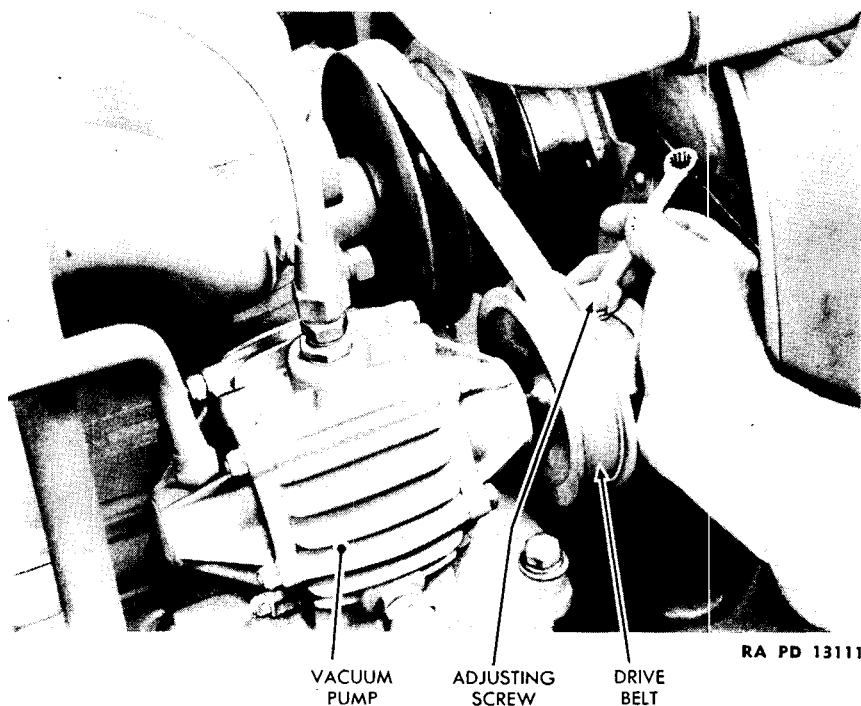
Adjusting Vacuum Pump Drive Belt - (Hercules Diesel)
